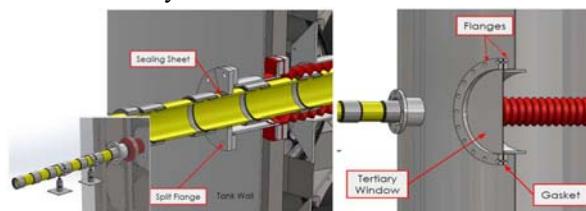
Detailed view of secondary beam window and two beam windows on the tank cross section
